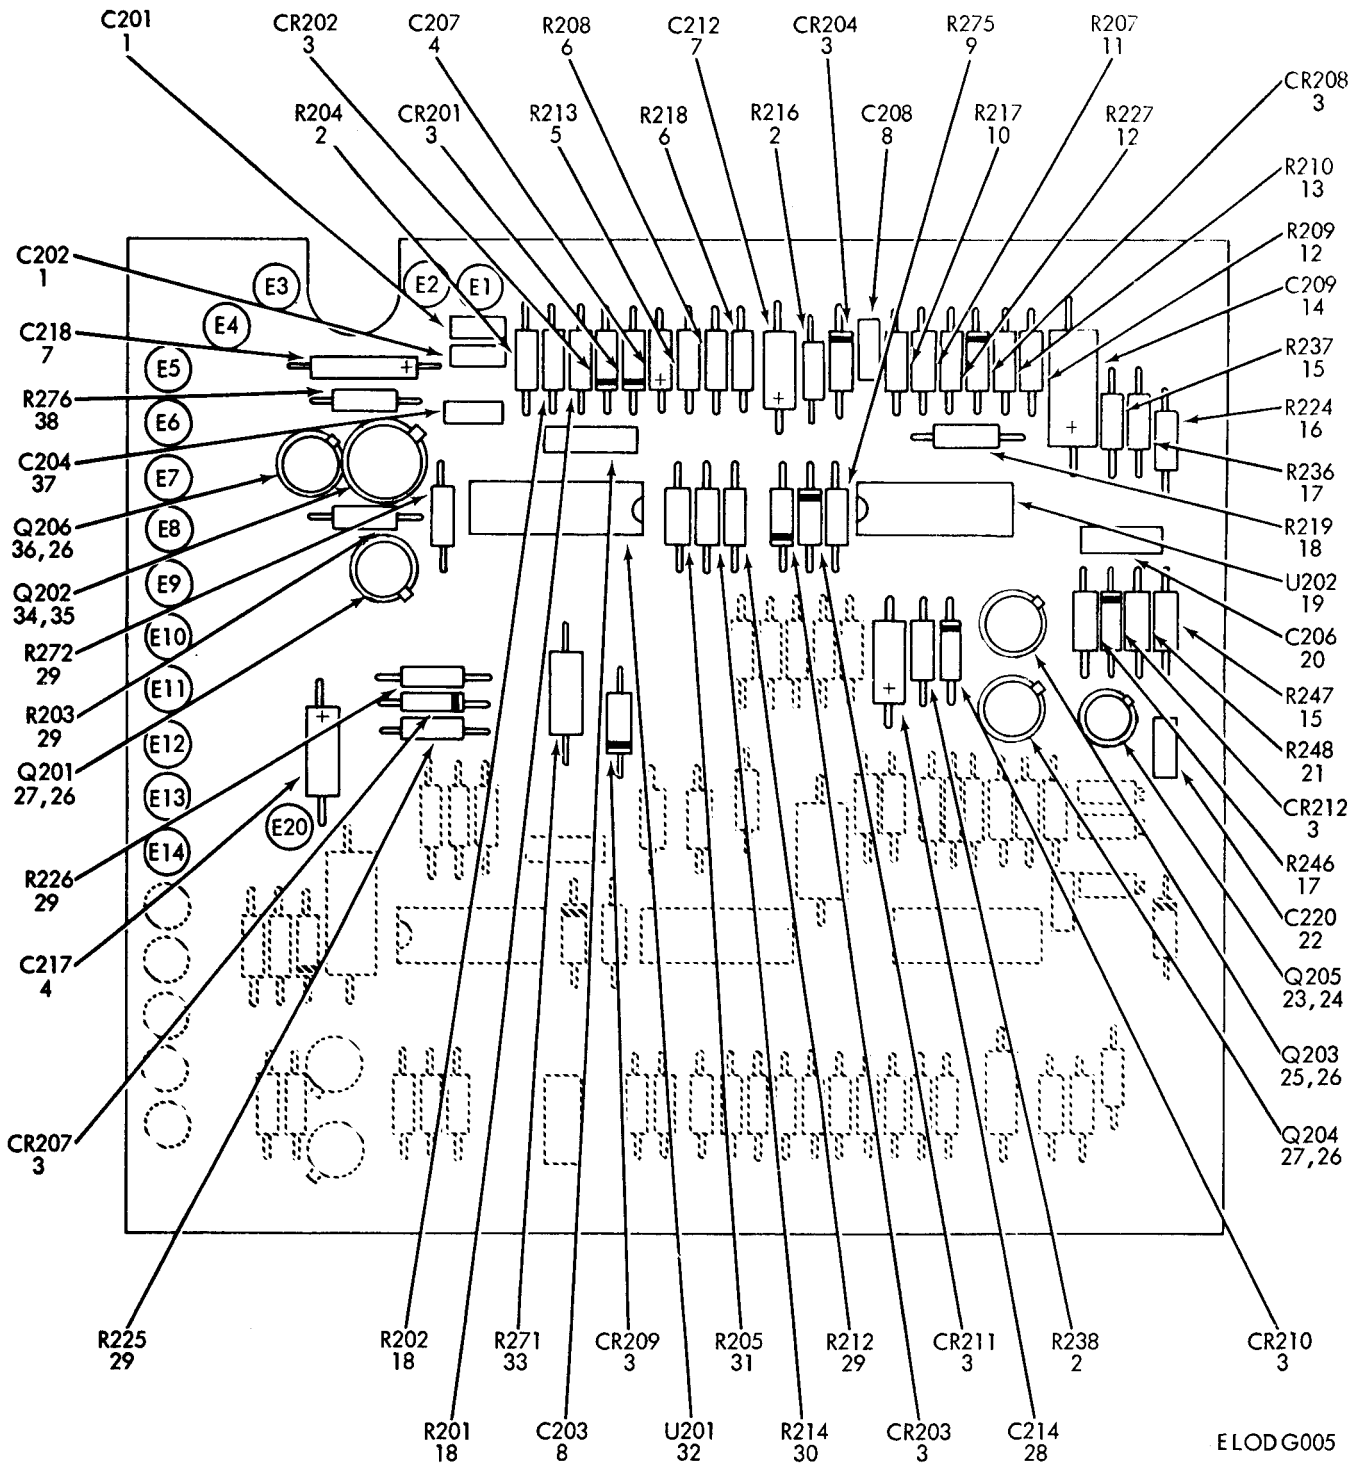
① Printed circuit board assembly 0A (sheet 1 of 2).
